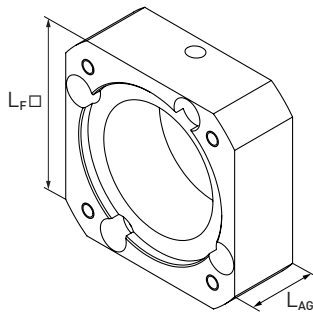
Gearbox adapter plate AG for linear modules HM-B, linear tables HT-B and cantilever axes HC
